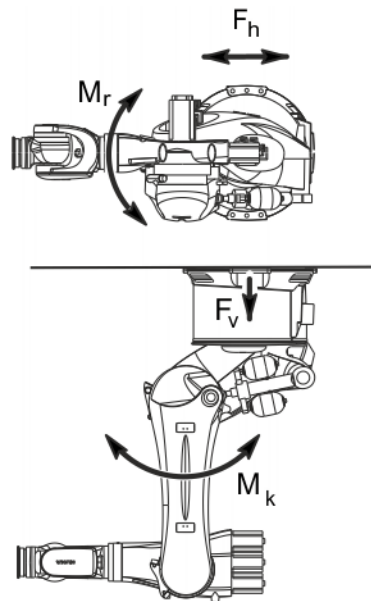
Loads acting on the foundation, ceiling mounting
